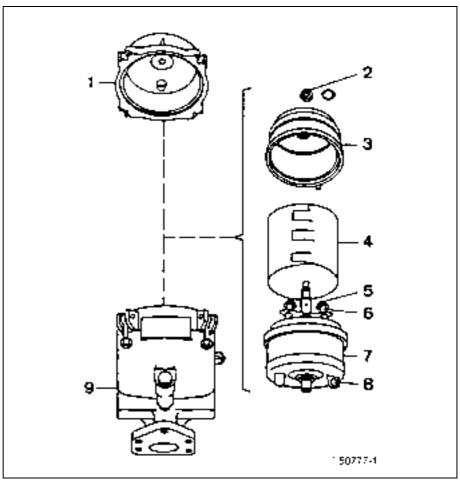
Centrifugal lube oil filter (lock with hinged screws)
